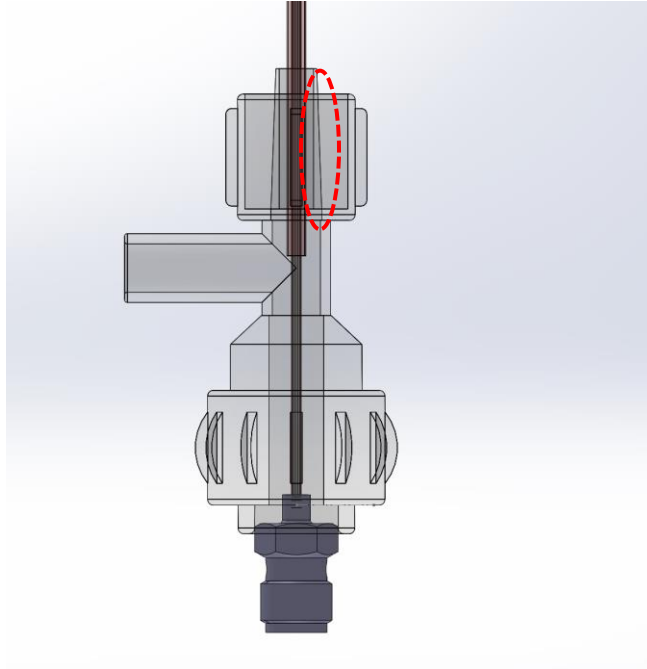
Positioning of the inflow polyimide tube. The location where epoxy glue should be applied is shown in red.
